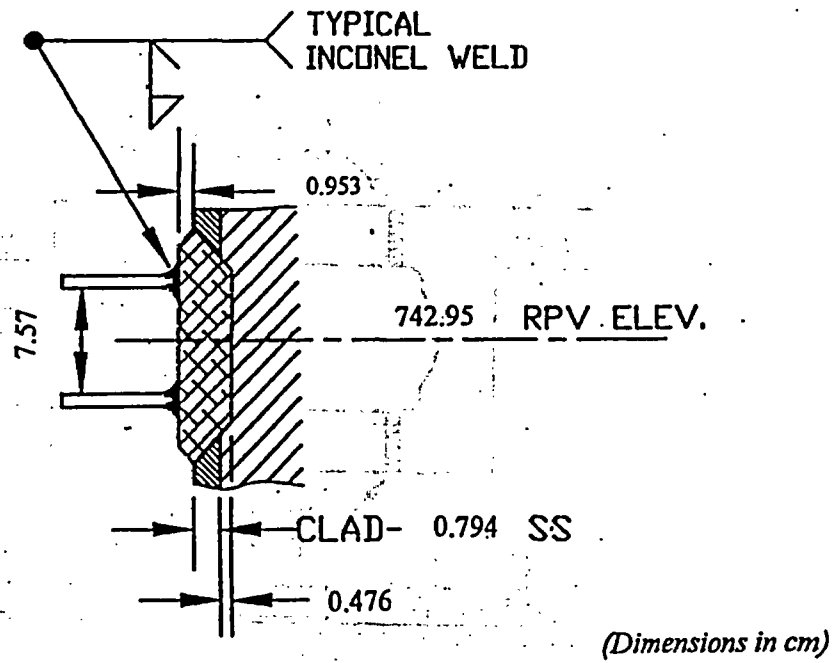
Horizontal View of Jet Pump Riser Brace Pad
